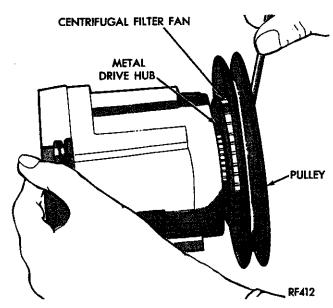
Installing Centrifugal Filter Fan DIVERTER VALVE
